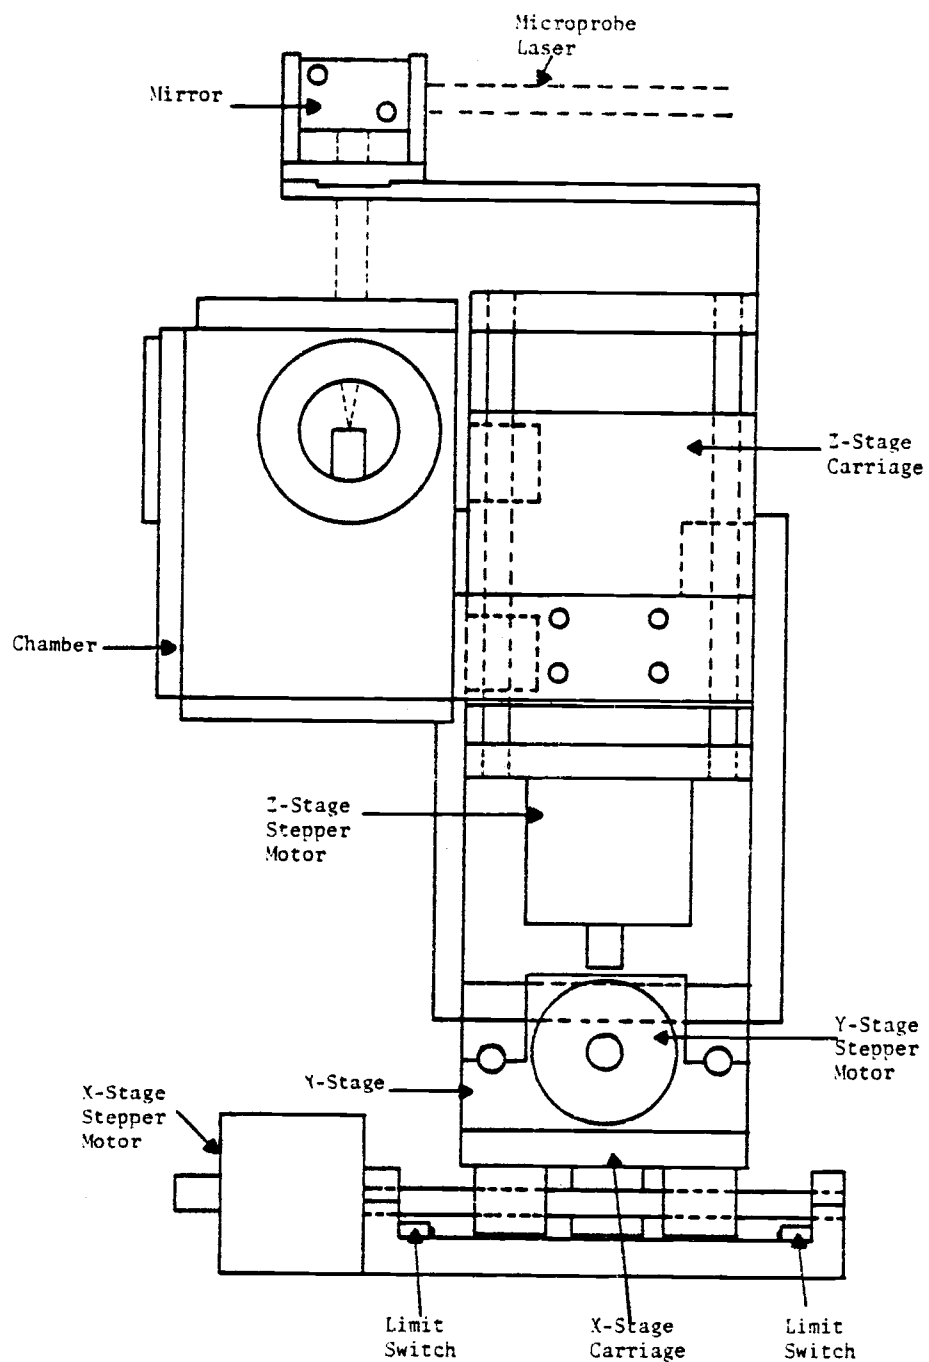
Side view of laser microprobe sample chamber on X, Y, Z stage assembly.
